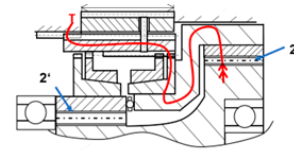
Torque flow in 2 gear (high-speed gear,  $i_{HE}$ ).
